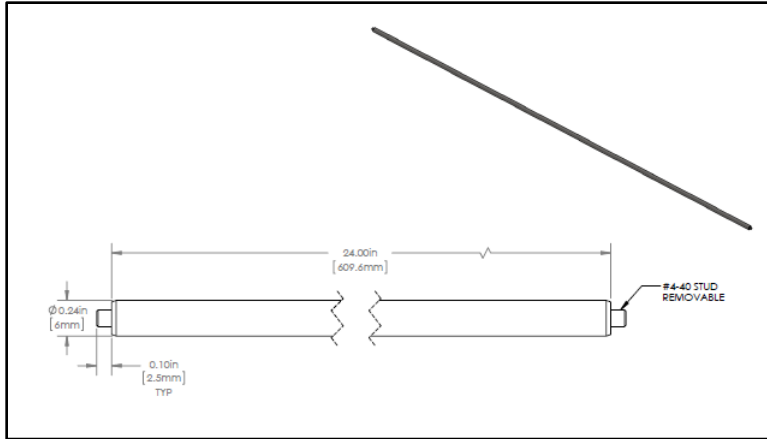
Thor Labs ER24- 24 in Cage Assembly Rod, Drawing [53]
